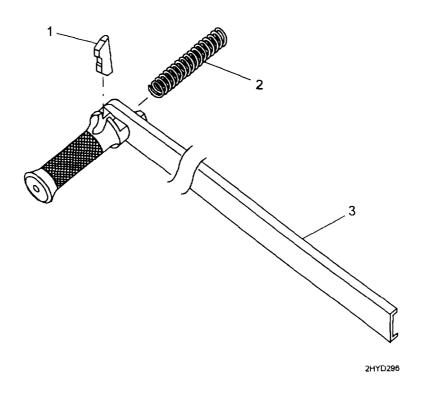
Group 14 Cocking Handle Assembly, 7791621
